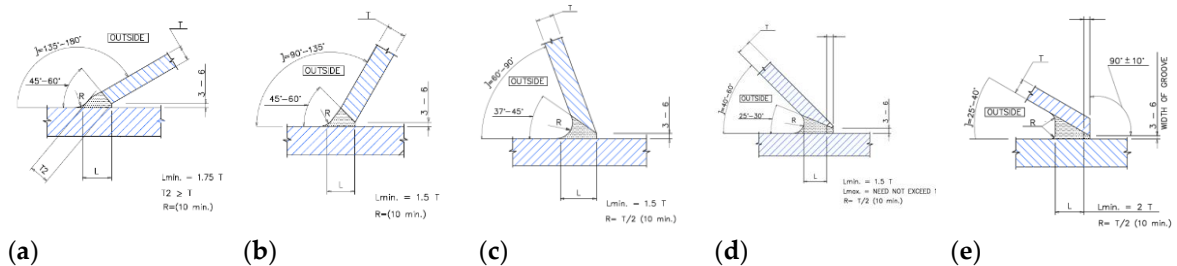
Single-sided weld detail of tubular joint (a) cross section 1; (b) cross section 2; (c) cross section 3; (d) cross section 4; (e) cross section 5
